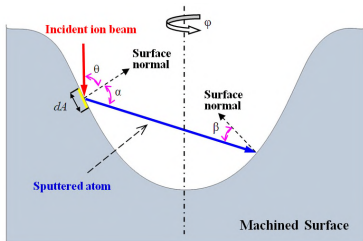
Schematic illustration of the generation mechanism of machined surface by ion beam machining
